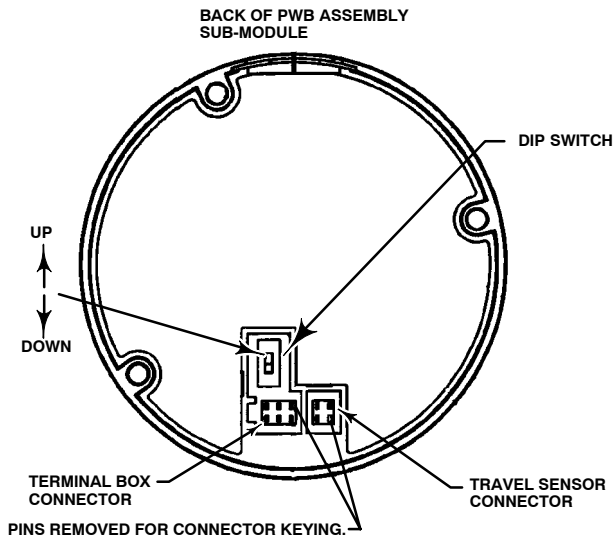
DVC6000 Series Digital Valve Controller DIP Switch Location
